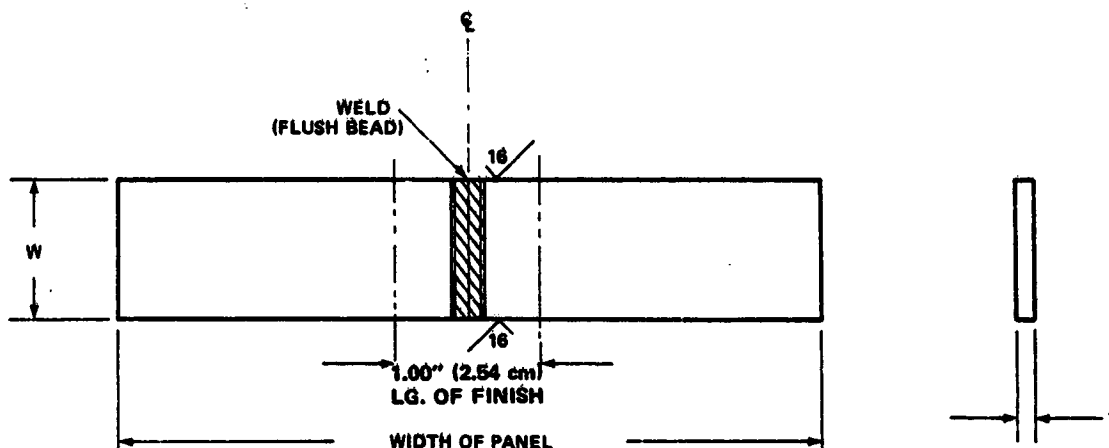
Transverse weld tensile specimen configuration for testing at ambient temperature.
